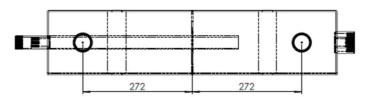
Dimensions of buffer tank ABT 50 without insulation.
